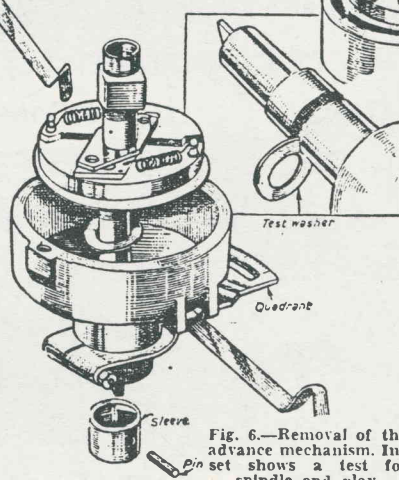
Removal of the advance mechanism. Inset shows a test for spindle end play.
